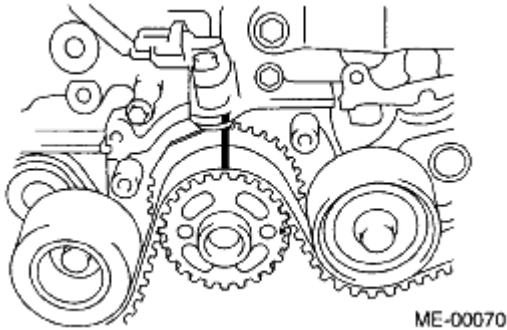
Identifying Crank Sprocket And Cam Sprockets
